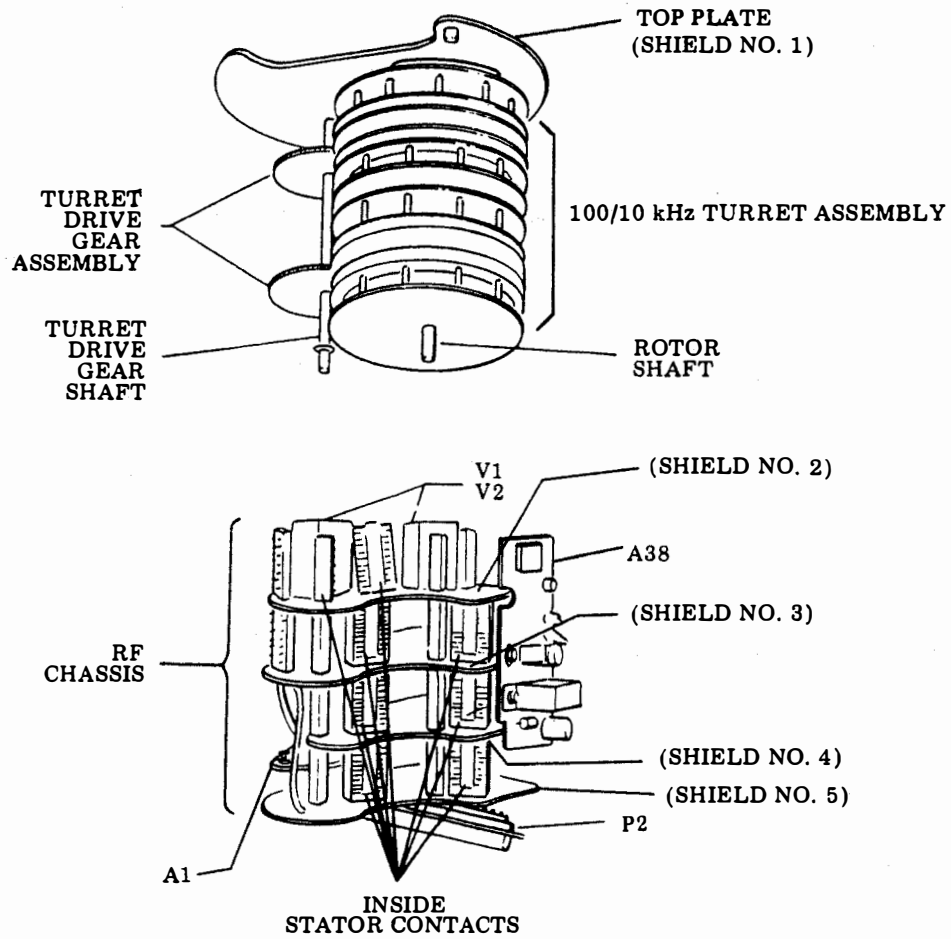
RF Amplifier Assembly A2A4, RF Chassis and Turret Assembly, Disassembly Parts Location
